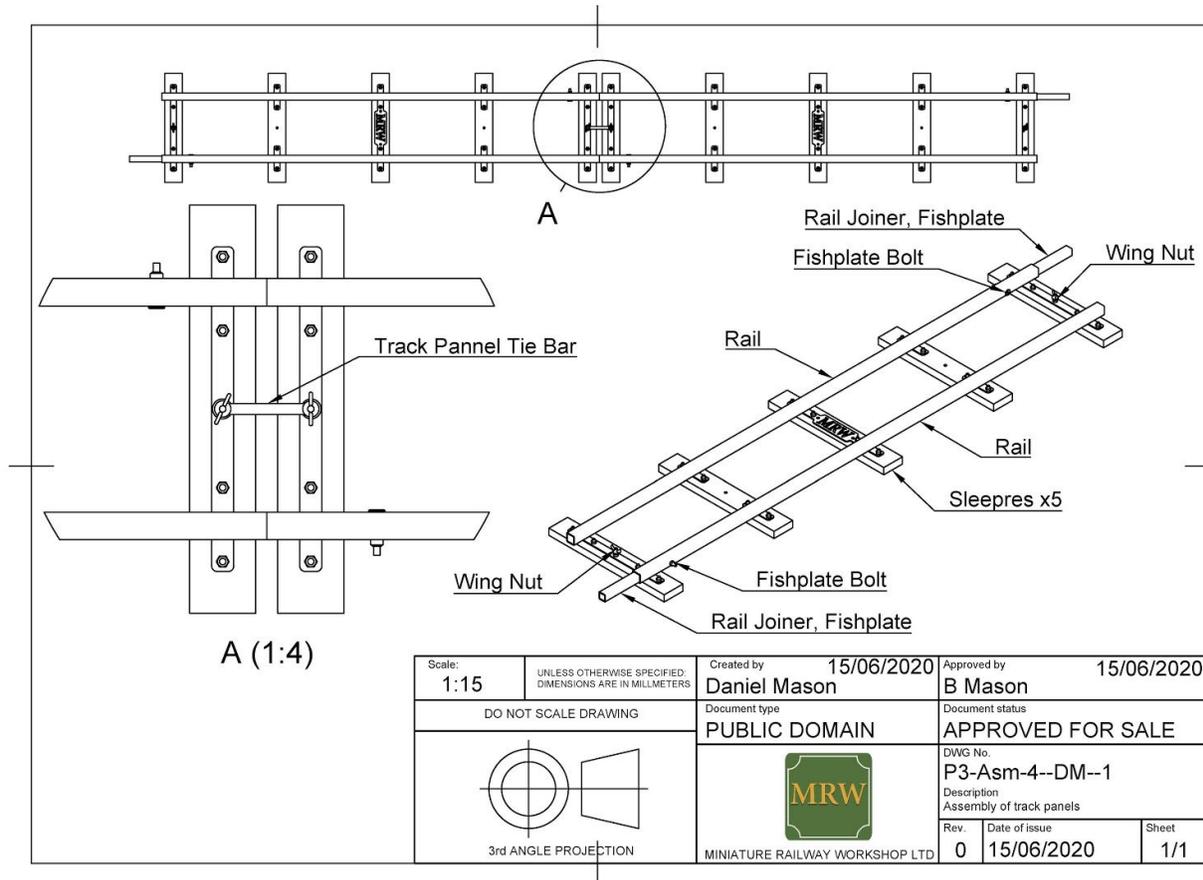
General assembly drawing of Jubilee Track assembly and component names, PDF available on the [“Technical”](#) page of our website.
